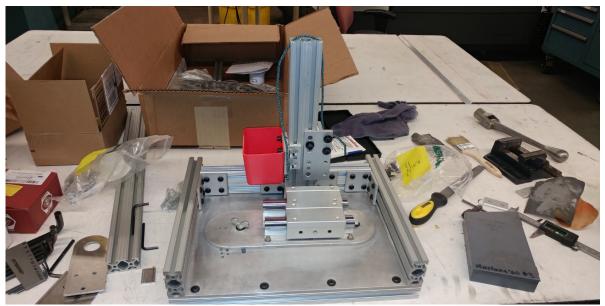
Dyno-Mite during early phases of manufacturing and assembly
